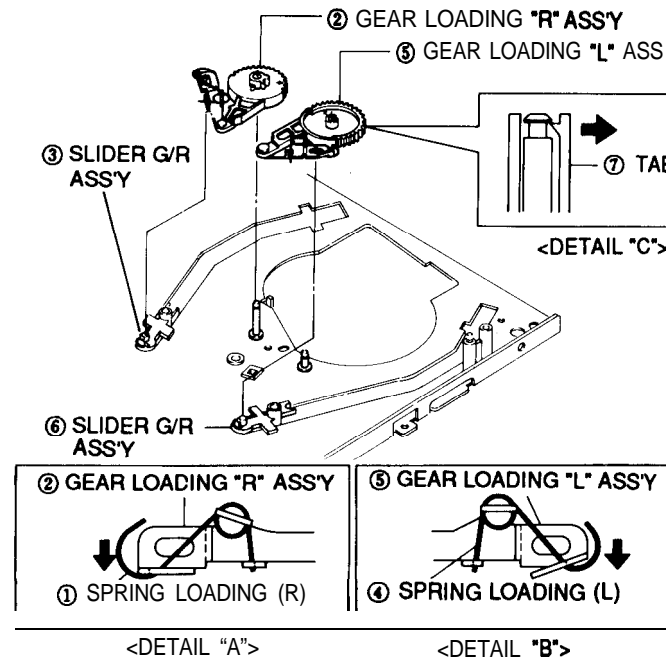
Gear Loading "L", "R" Ass'y Removal
